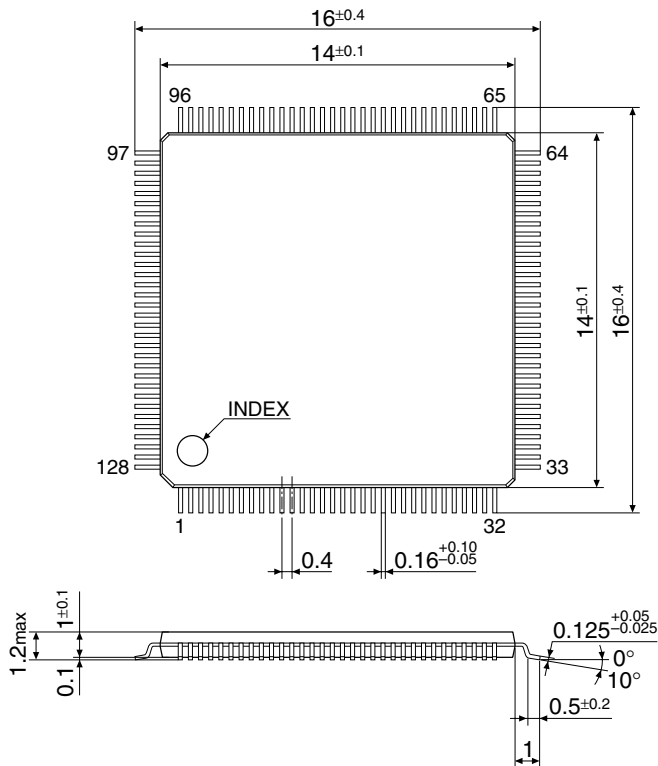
TQFP15-128pin Package Dimensions
